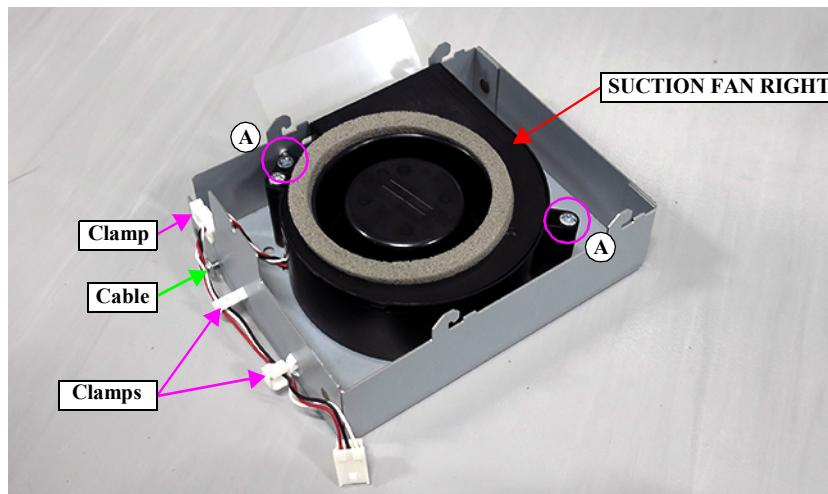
Removing the SUCTION FAN RIGHT (3)
